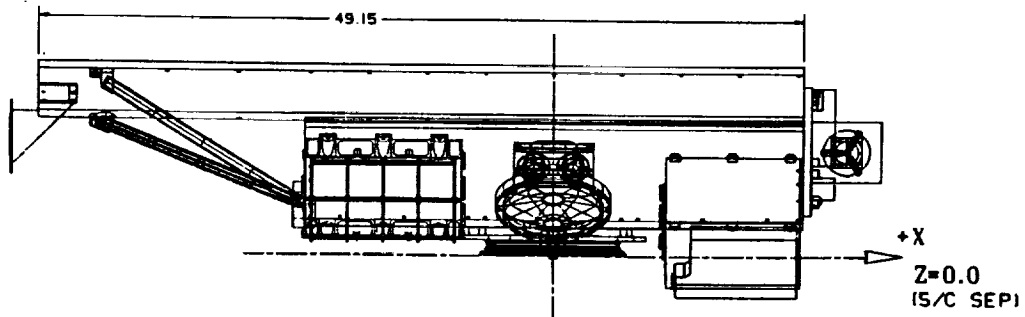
CSI-Star CAD Layout Drawing - Exploded View
